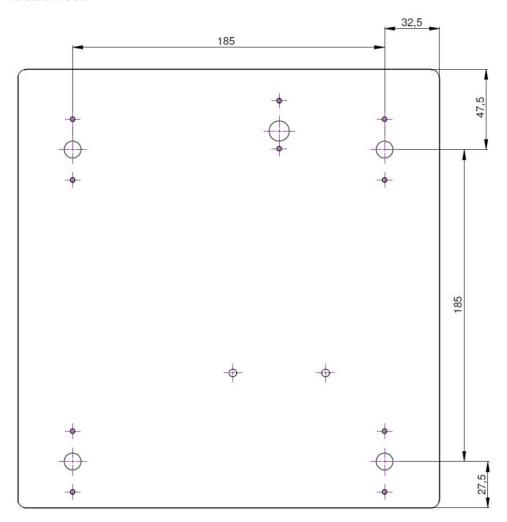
g Drawing of the 4 fixing holes in the Mounting Plate
